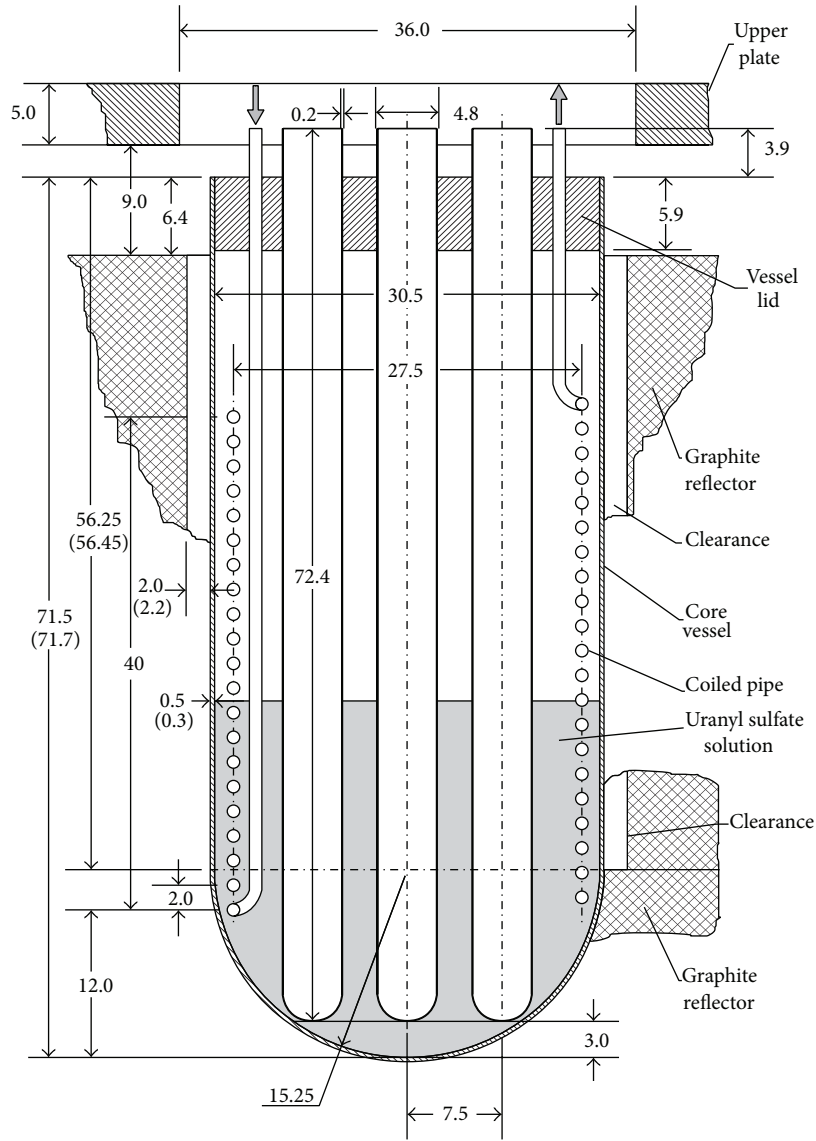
Schematic drawing of the longitudinal section of the assembly core [12].
